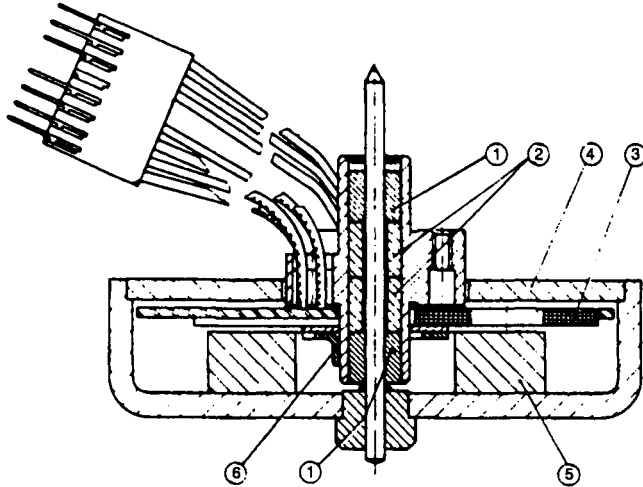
Two-coil motor for directly driving the playback shaft of a cassette recorder
